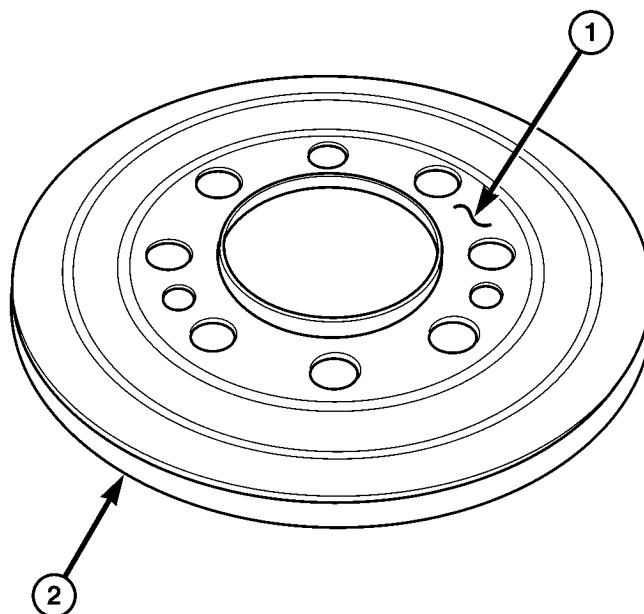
REAR CRANKSHAFT SEAL ASSEMBLY
